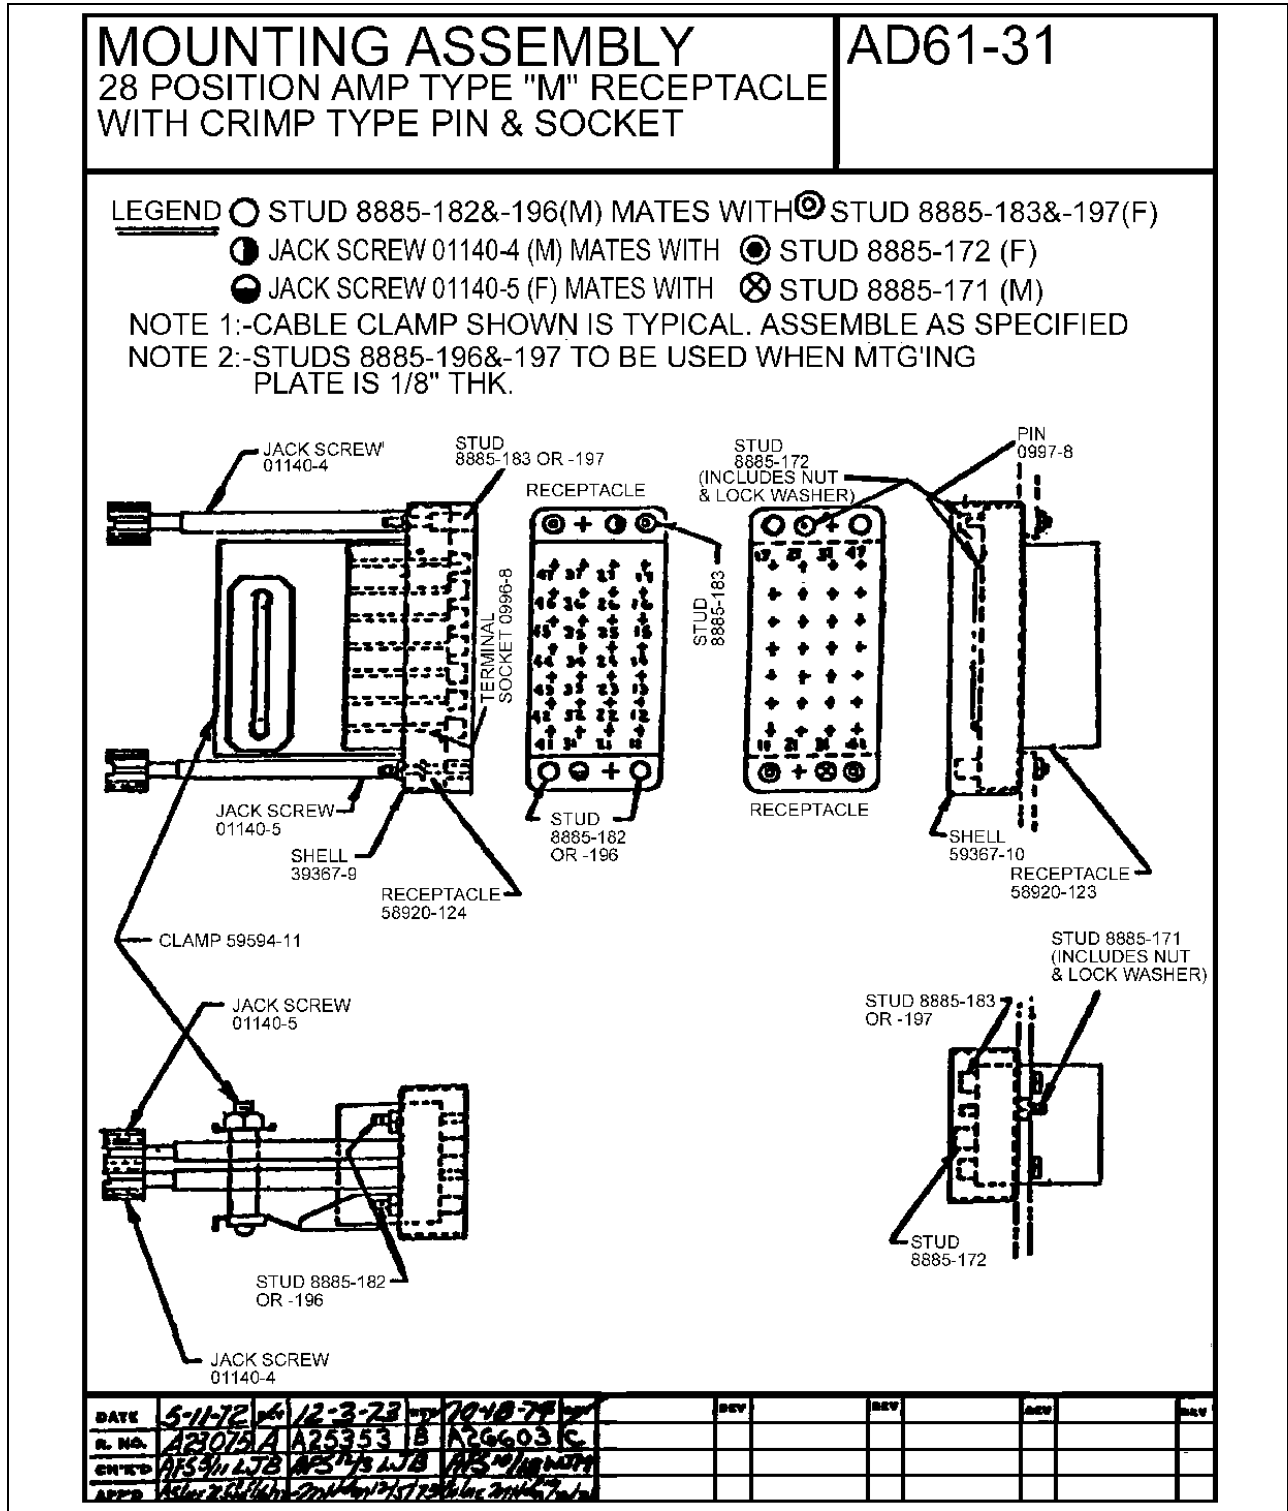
Connector, Plug, 28-Way, Mounting Assembly, AD61-31
